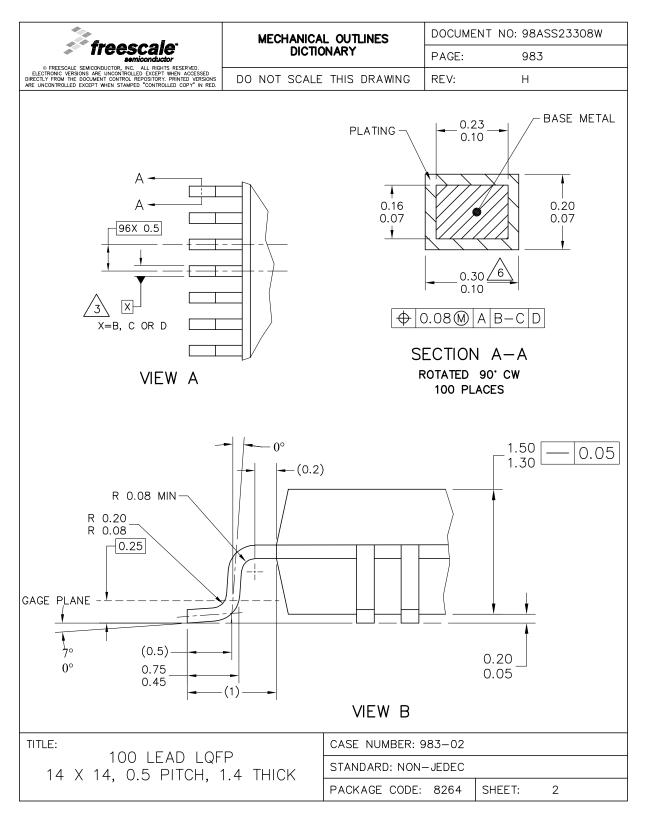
100 LQFP package mechanical drawing (Part 2 of 3)
